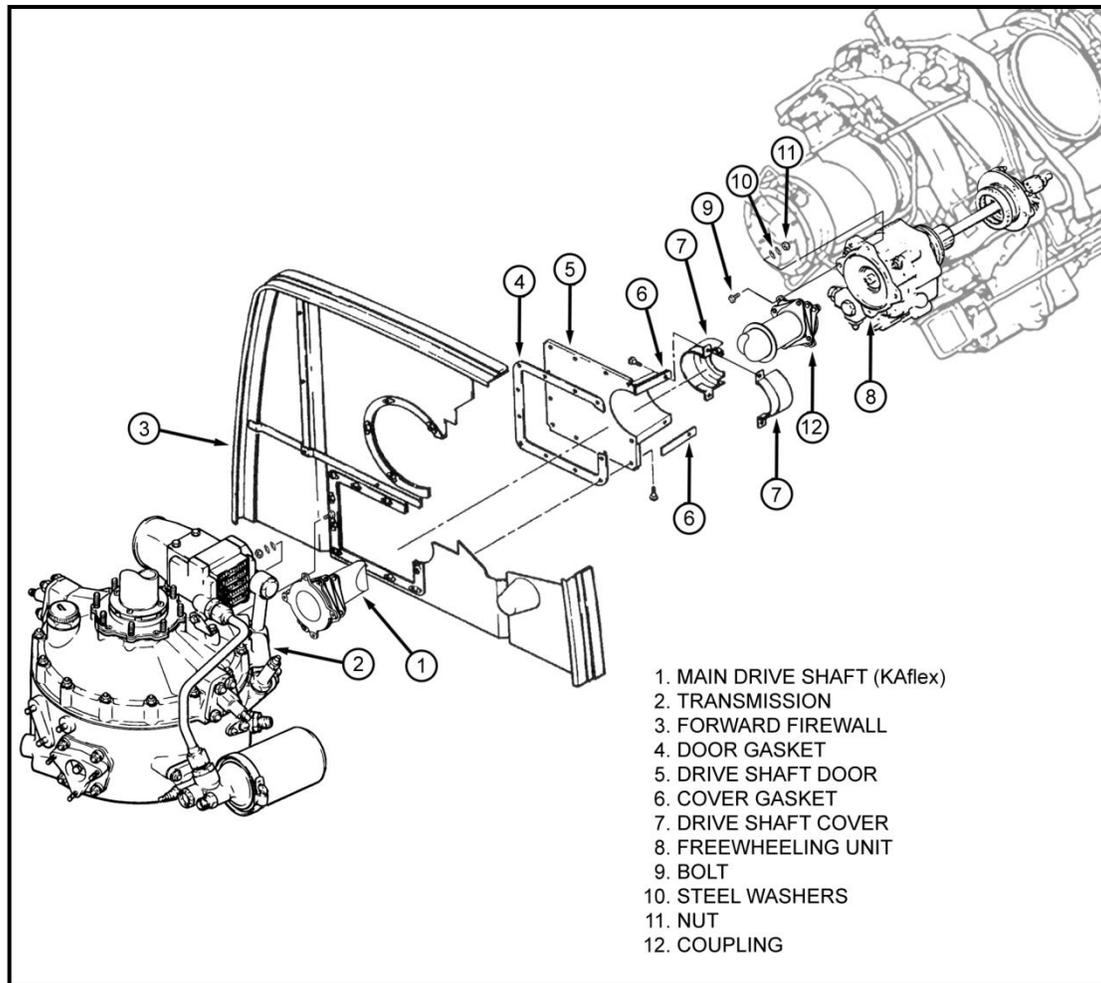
Engine to Transmission Drive Shaft Assembly
